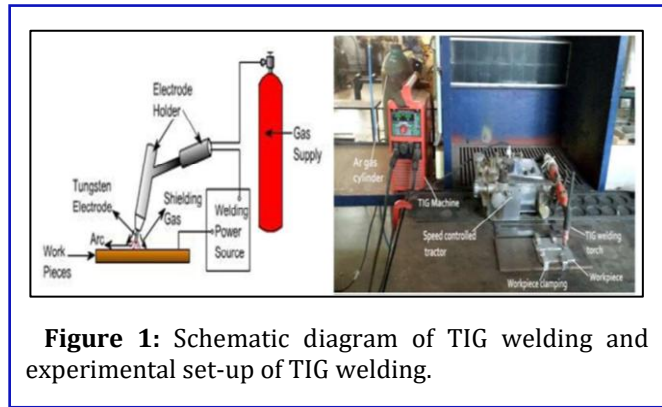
Schematic diagram of TIG welding and experimental set-up of TIG welding.
